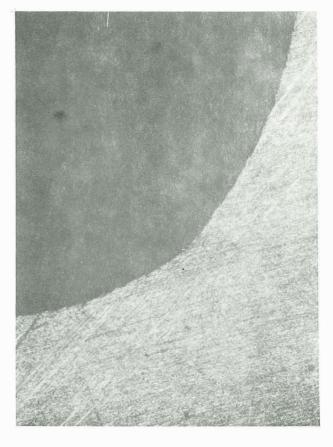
Photographs of Vane Fillets at Impeller Eye on First Trial Sample After Chem-milling of 0.020 Inch (Magnification 40X)
